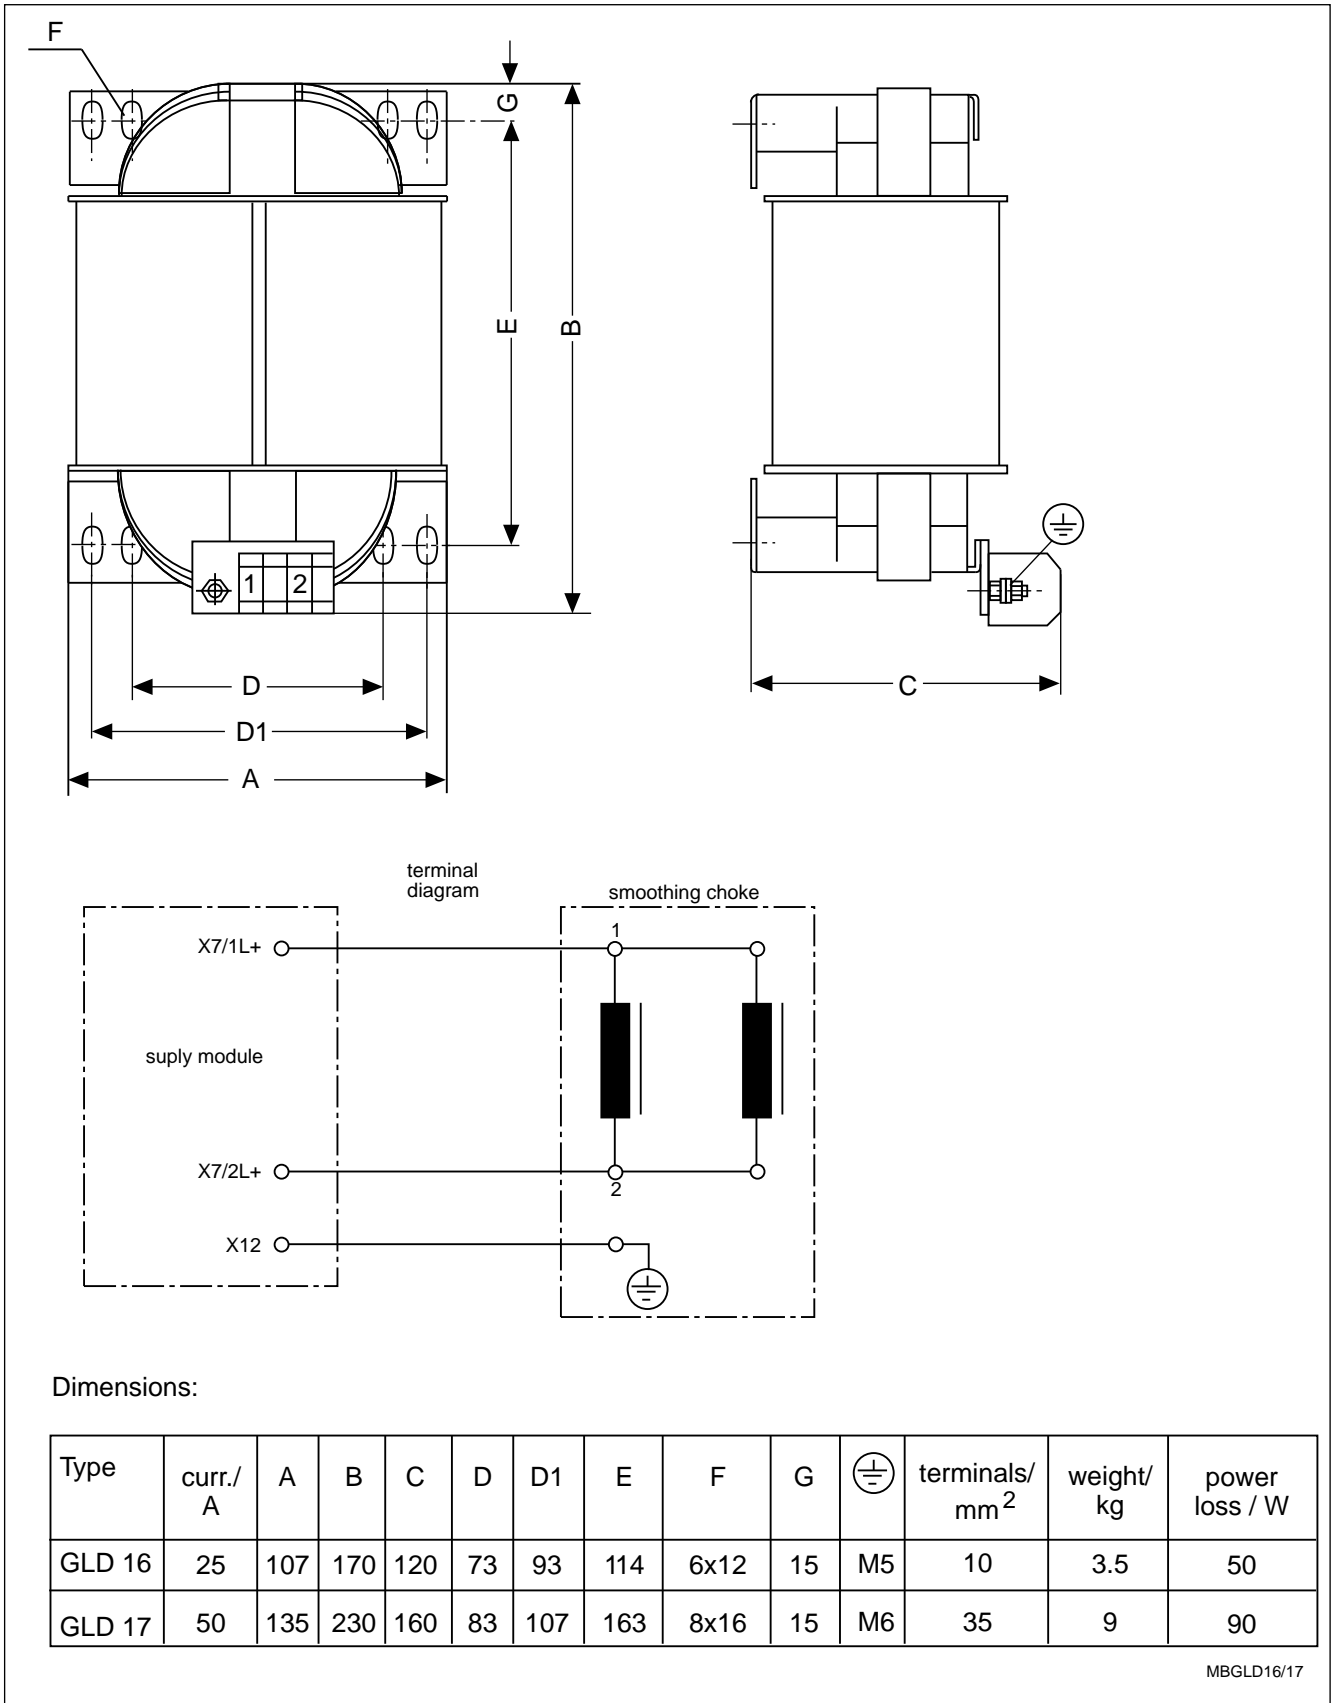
Smoothing choke GLD 17 dimension sheet
